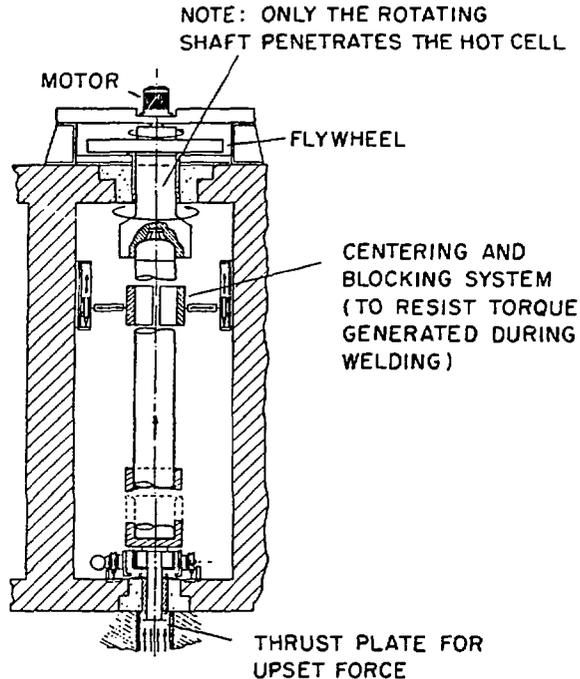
Illustration of Friction-Welding Machinery
